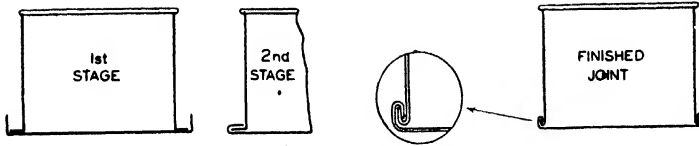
KNOCKED-UP BOTTOM JOINT
